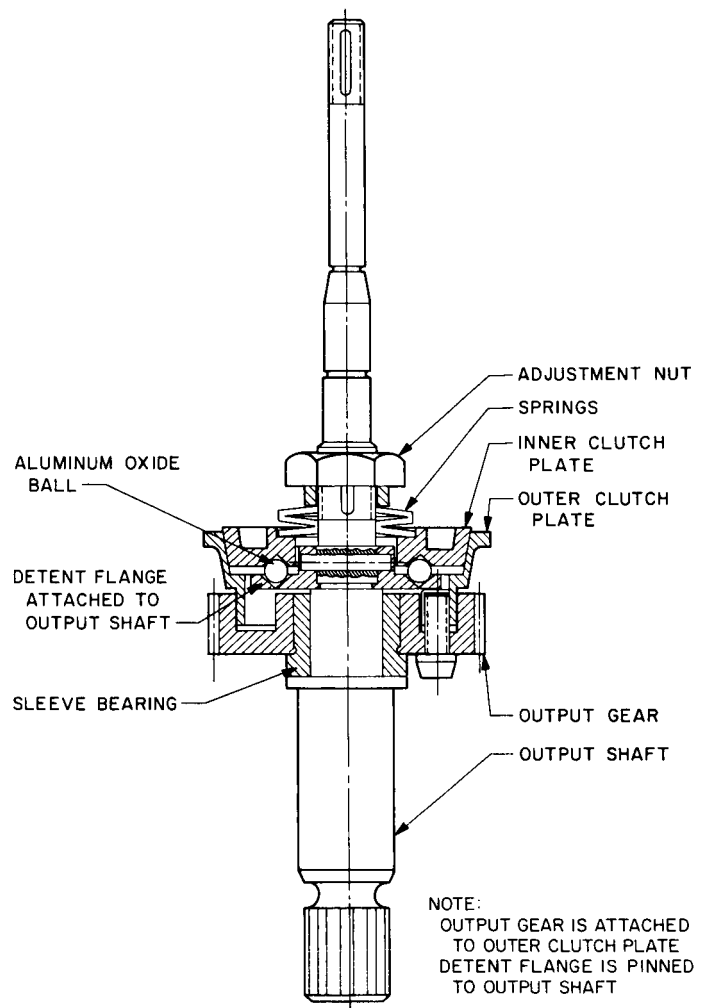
Clutch assembly for *Mariner IV* scan mechanism
